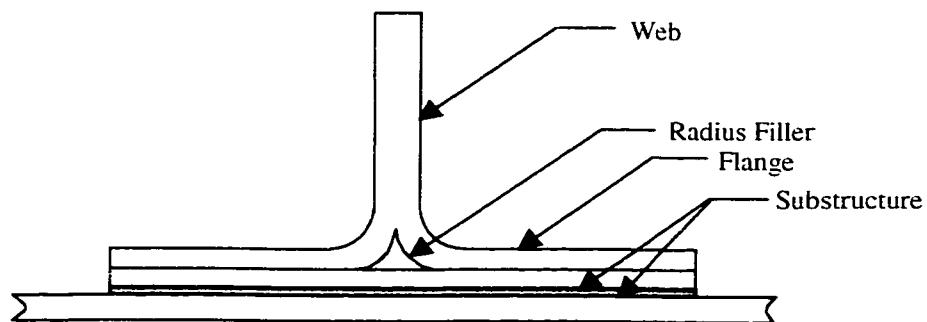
Adhesive Bonded Composite T-Joint With Radius Filler.
